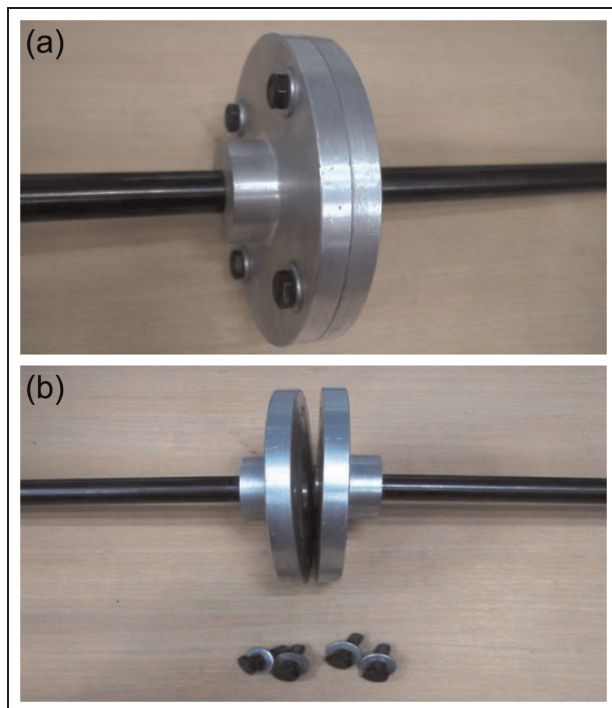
View of the cracked shaft: (a) joined by the four bolts; (b) disjoined.
